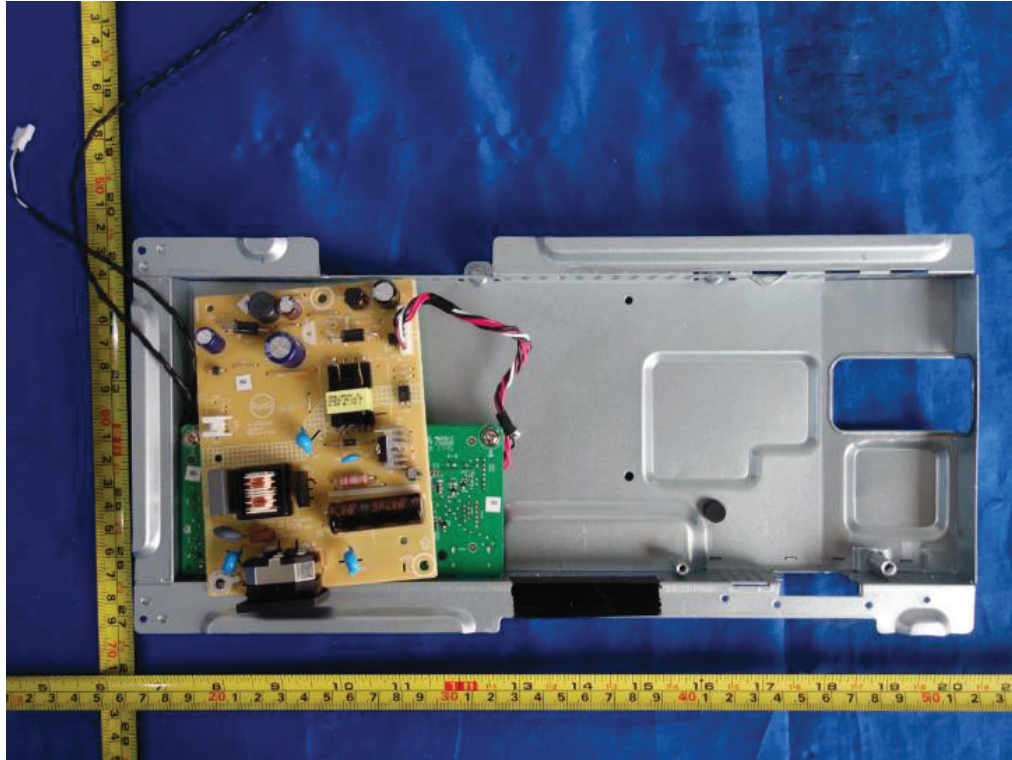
Metal enclosure type B with power board 715G7300 and main board 715G9494
